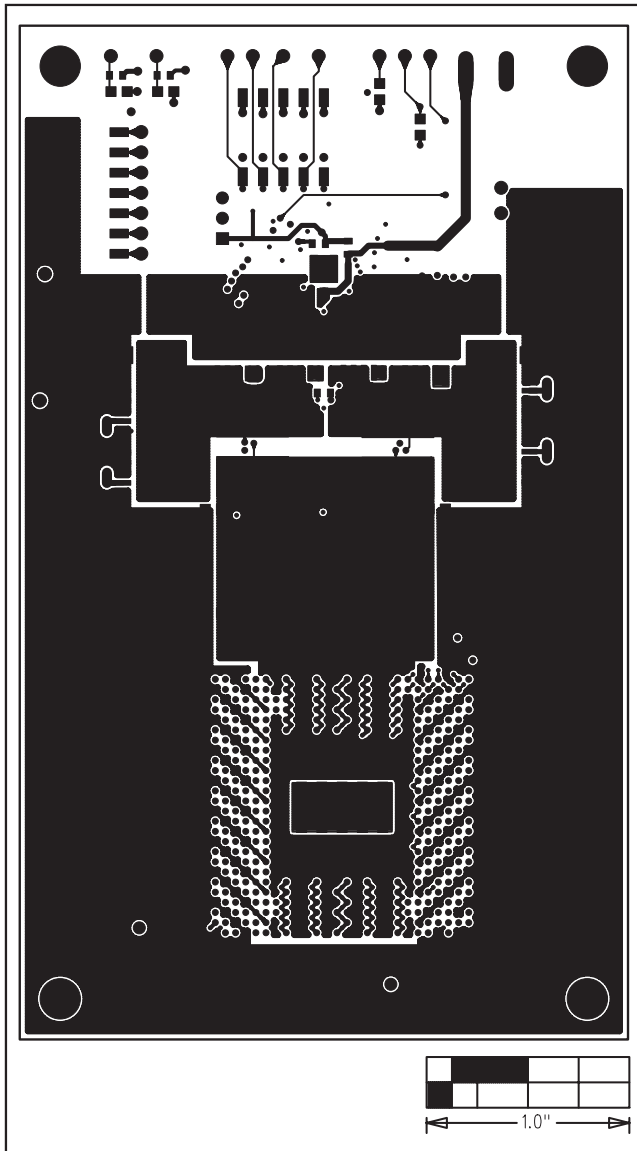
MAX17021 EV Kit PCB Layout—Component Side
